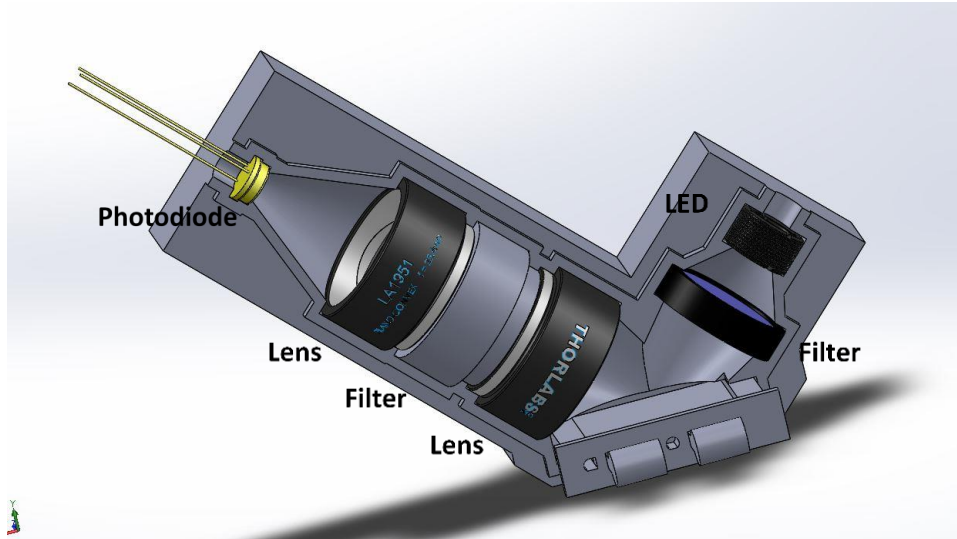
Cross sectional CAD diagram of Prototype 3 showing the optical elements incorporated into the design.
